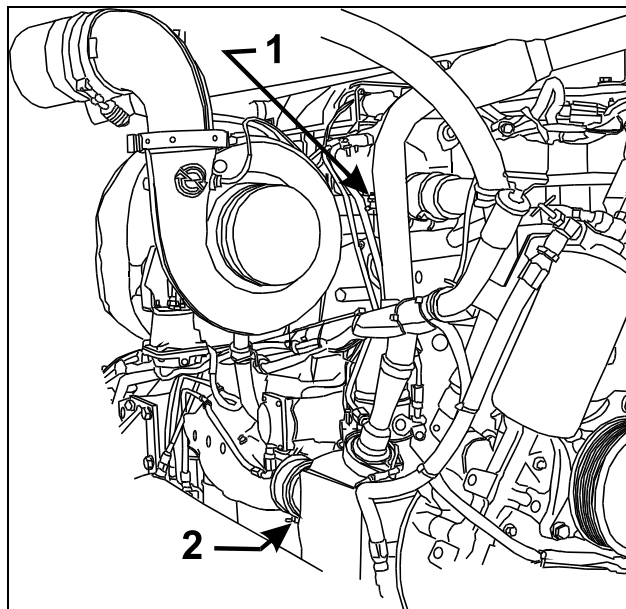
ENGINE COOLANT DRAIN COCKS
